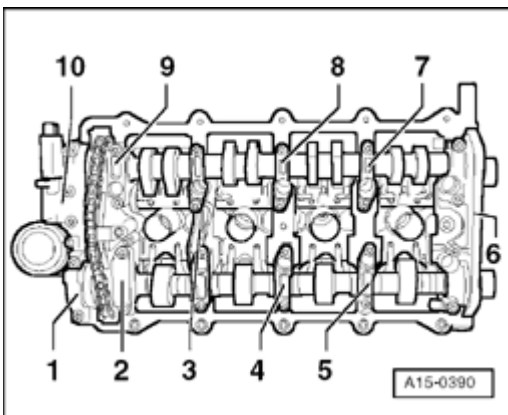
Installing Camshafts Without Chain Into Cylinder Head And Tightening With Bearing Caps
